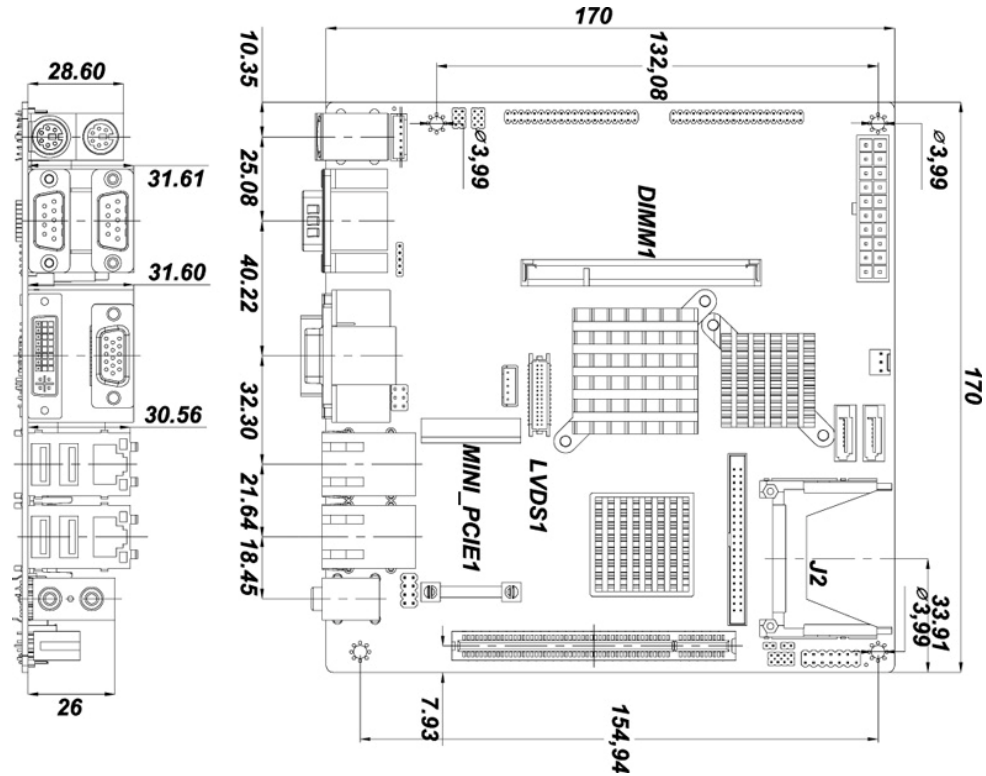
KINO-945GSE3 Dimensions (mm)
